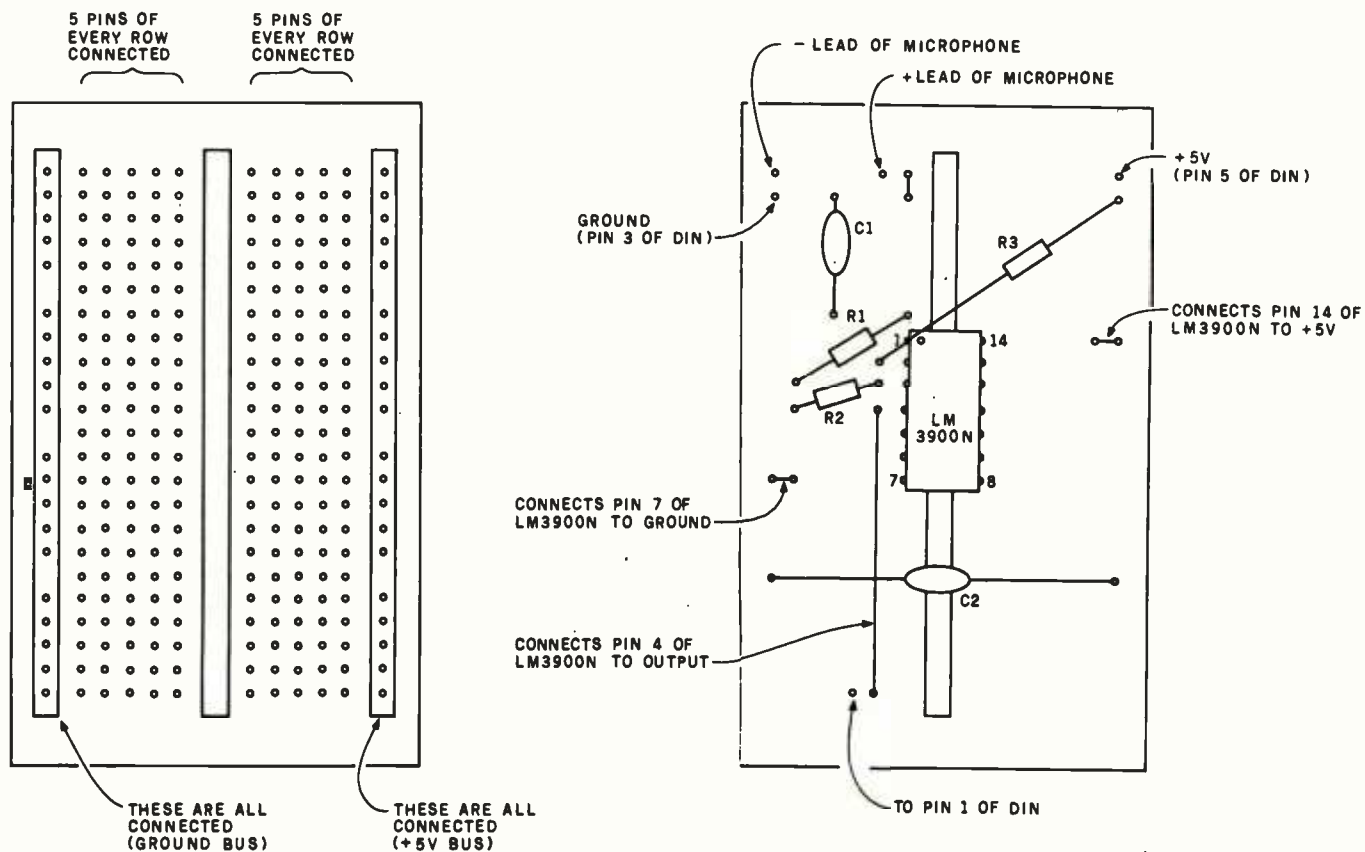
The project uses an inexpensive prototype circuit board, which allows the six components to be connected without soldering or wire-wrapping.
